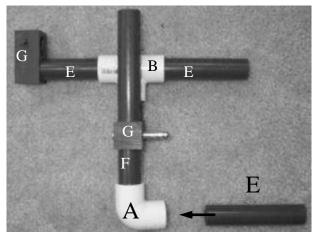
Assembly of the Small Wheelchair (Step 9).
